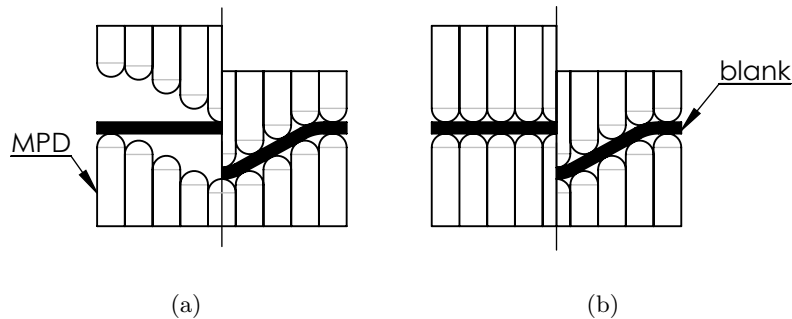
Basic multi-point forming operation: (a) multi-point forming, (b) continuous contact multi-point forming
